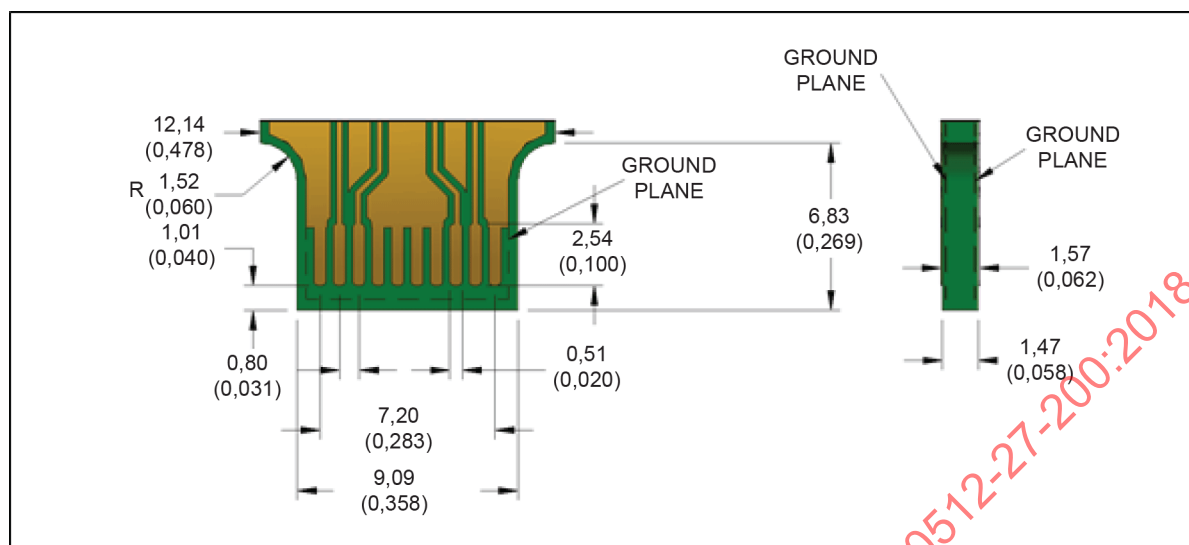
Balun fixture PCB paddle card interface mating dimensions
